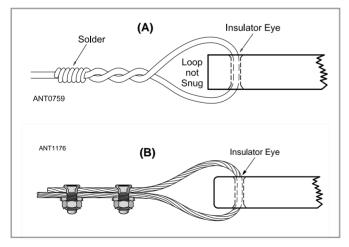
The insulator at A uses a conventional twisted attachment which is soldered with a non-acid flux solder and can be sprayed with outdoor acrylic for protection. At B, split bolts may be used to provide a secure connection between heavy wires, such as at an insulator or splice. Using a pair of split bolts provides a more mechanically secure connection. For both types of connection, do not make the wire loop too snug to allow the wire loop to move in the insulator and flex.
